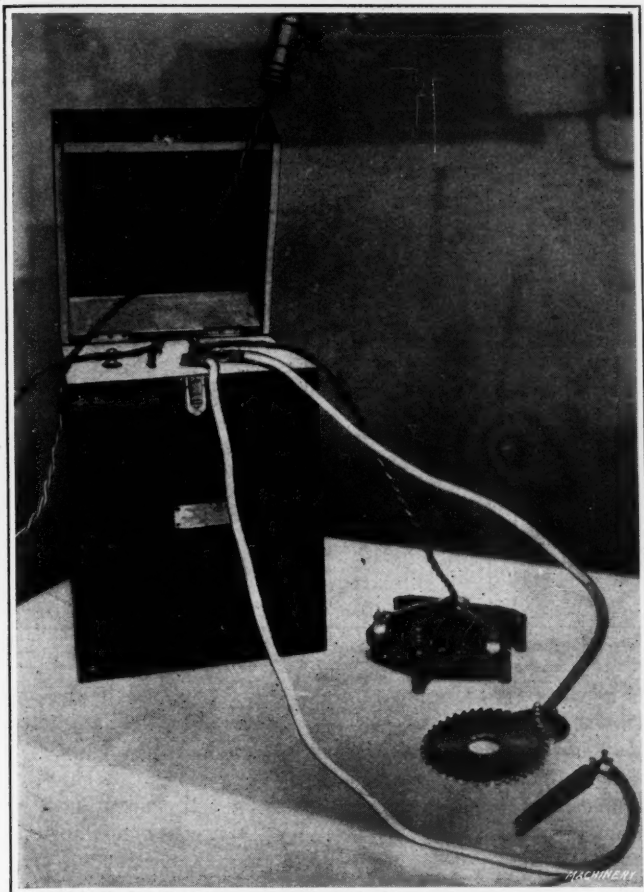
Electric Marking Machine known as the "Etchograph," made by William Brewster & Co., Inc.
